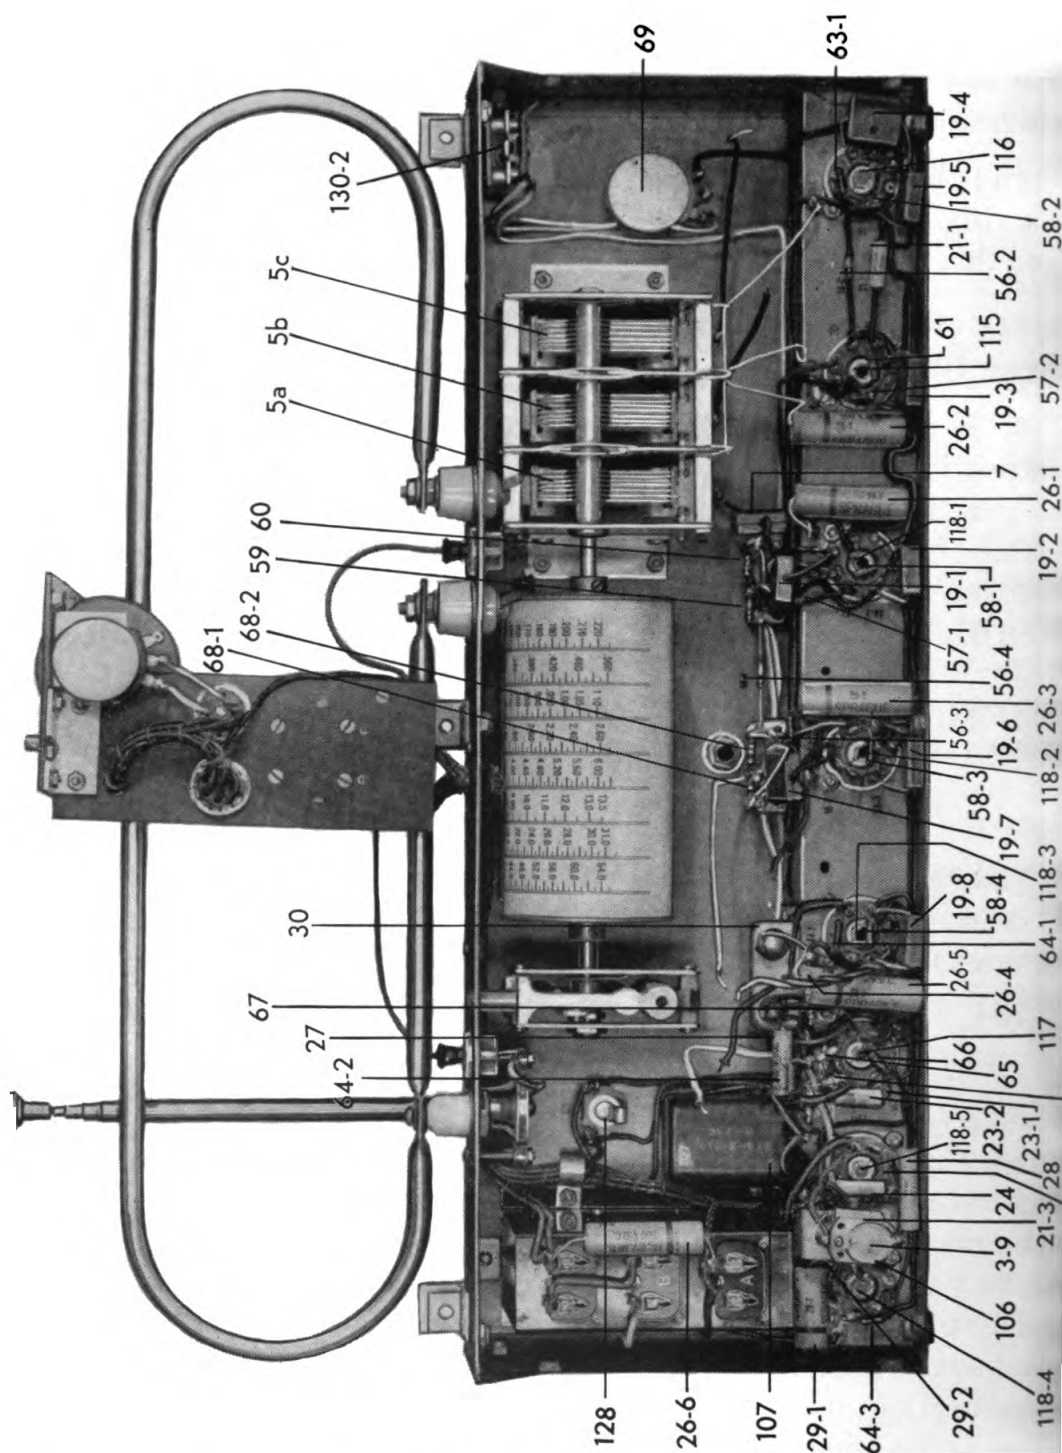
Radio Receiver BC-792-A, Rear View With Band Switch Assembly Removed From Chassis, Showing Reference Numbers of Parts
